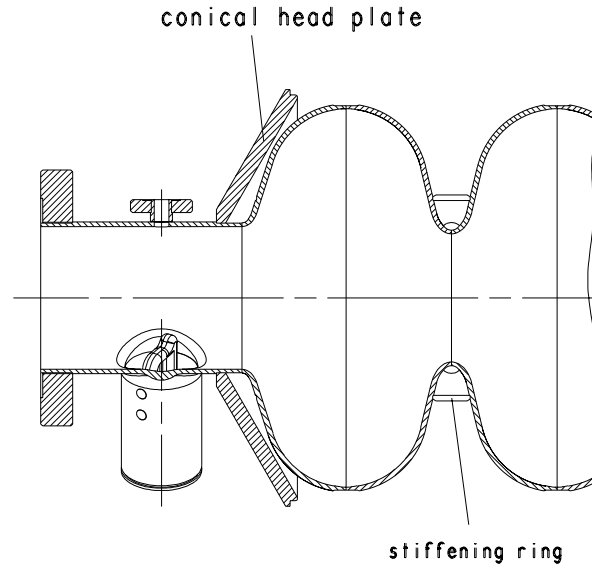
End section of a cavity with stiffening ring and conical head plate for welding into the helium tank.
